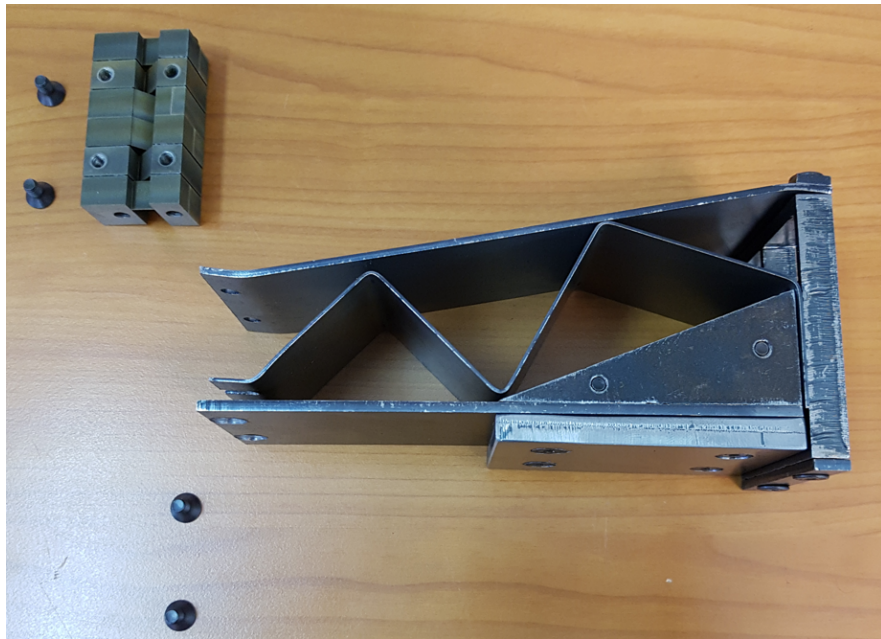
Fastening the 2 mm top cover plate to the long wall component.
